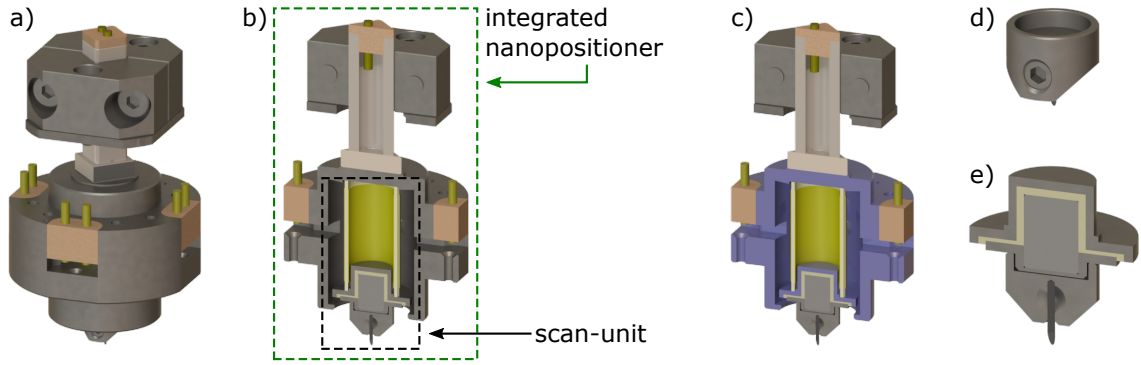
(a) Complete assembly of the inner STM, (b) Sectional view of the inner-STM with highlighted integrated nanopositioner and scan-unit, (c) Piezo shielding coloured in blue consisting of: the scanner platform, four scanner shields and shielding platform, (d) tip-holder with attached tip, (e) Sectional view of the tip holder socket and attached tip holder.
